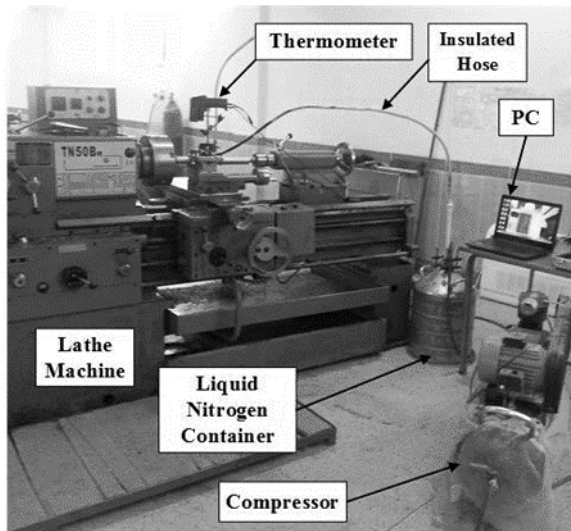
Lathe machine and the used equipment for cryogenic cooling
